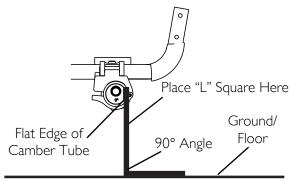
Adjusting the Axle Tube - Camber Tube 2000
